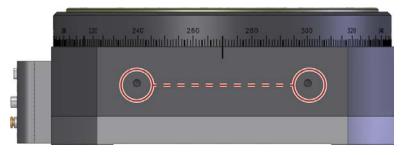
Side View of an ABRS250MP Stage Showing Tapped Fixturing Holes
